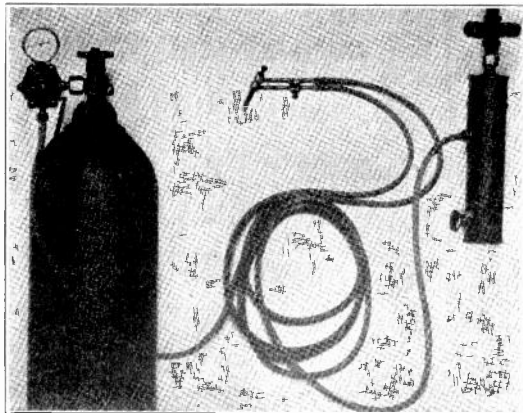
This view shows the method of connecting a lead burning torch to the gas cylinder and piping, and also shows the mounting of the pressure regulating valve on the gas cylinder.
